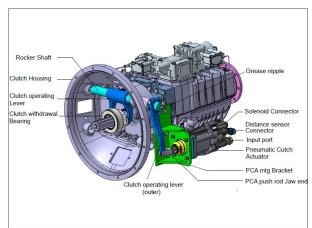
Assembly of gearbox & dry clutch system used for AMT
